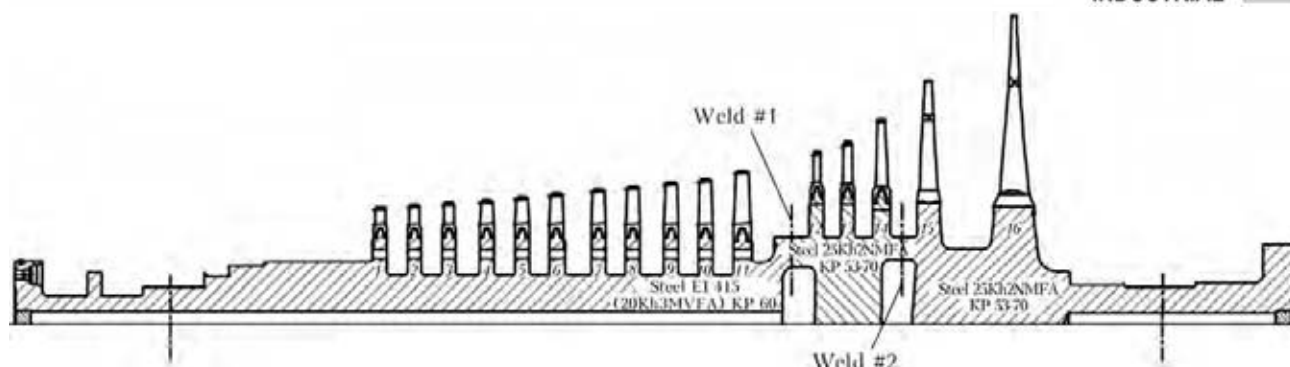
Sketch of longitudinal section of MPC welded rotor of 325 MW turbine.
